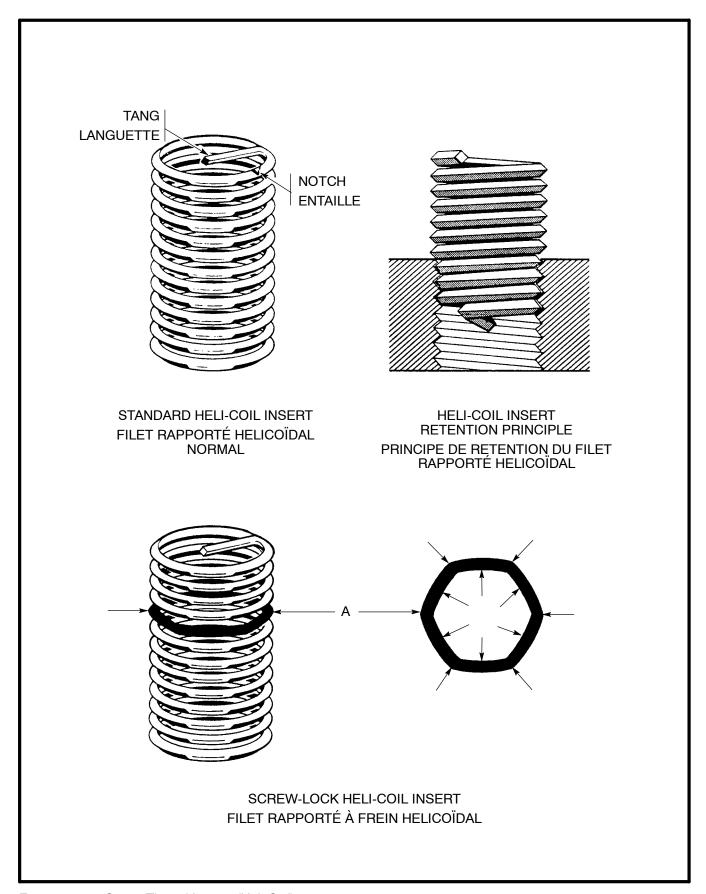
Screw Thread Inserts (Heli-Coil)
